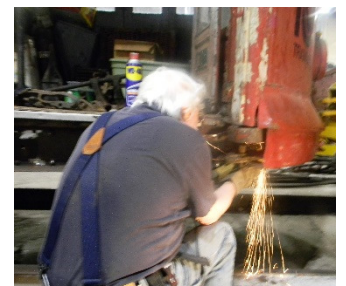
Tony grinds down some stubborn, rusted bolts on 5223. Photo: Bob Hooper
